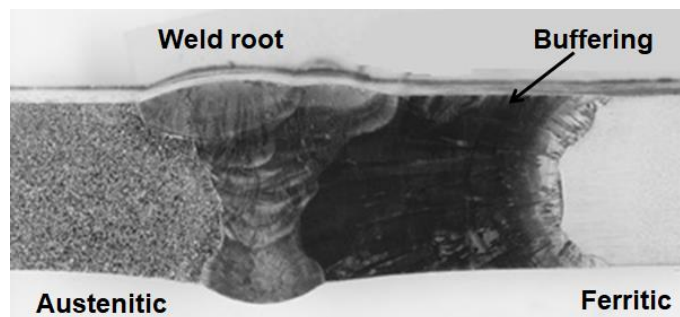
Photograph from the cross-section of a dissimilar weld sample
